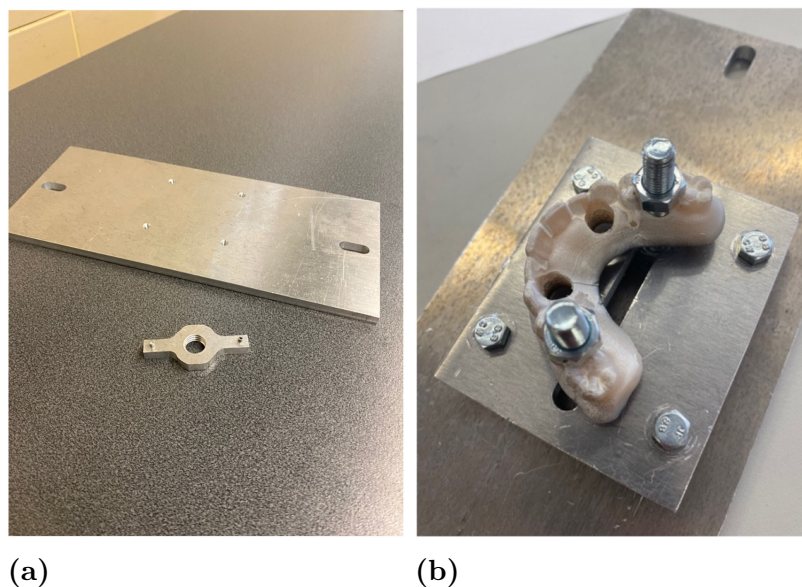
Metal parts: (a) On top, the base for both the supports with the four holes made for M5 screws and, on the bottom, the charge plate; (b) Complete prosthesis fixed in the support with M7 screws and nuts.
